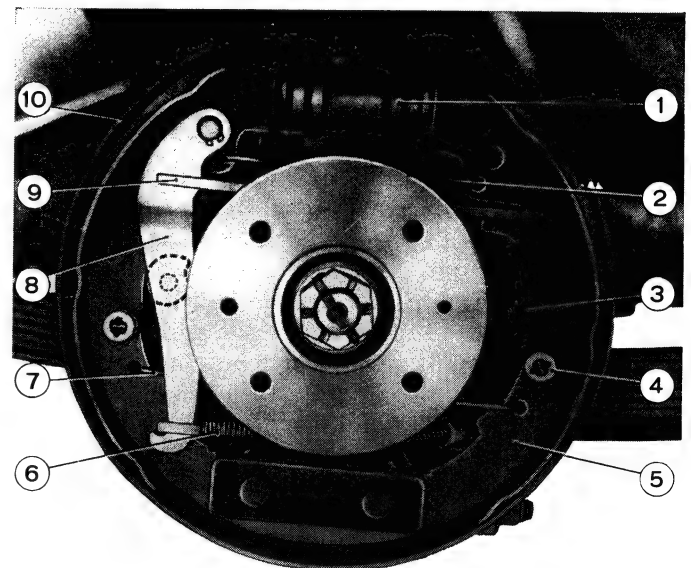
Right rear wheel brake backing plate assembly (1500 Cabriolet).
